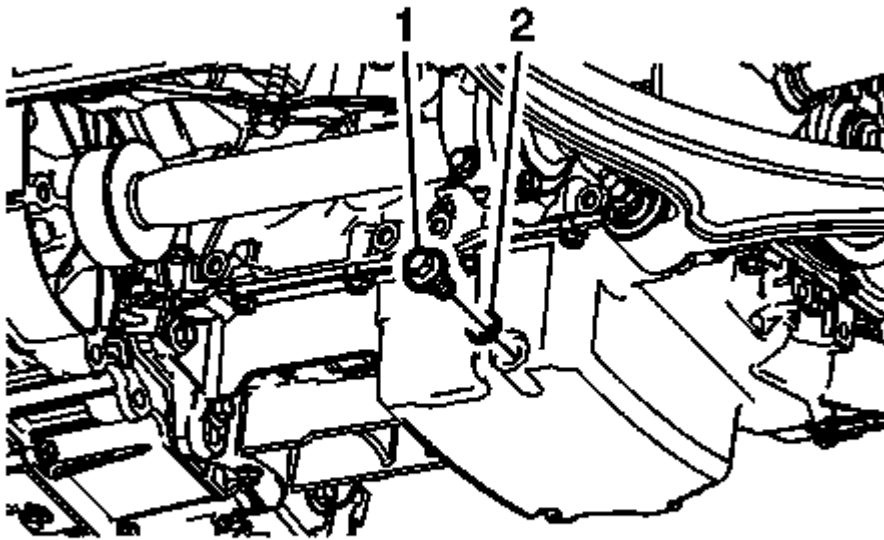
Turning Crankshaft Against Direction Of Engine Rotation
